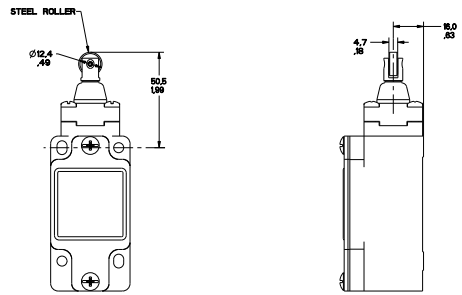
TOP ROLLER PLUNGER HEAD
